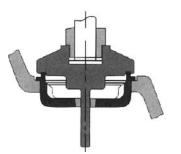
Soft-plug design. (Courtesy of Pacific Valve Group, a unit of the Crane Valve Group)
